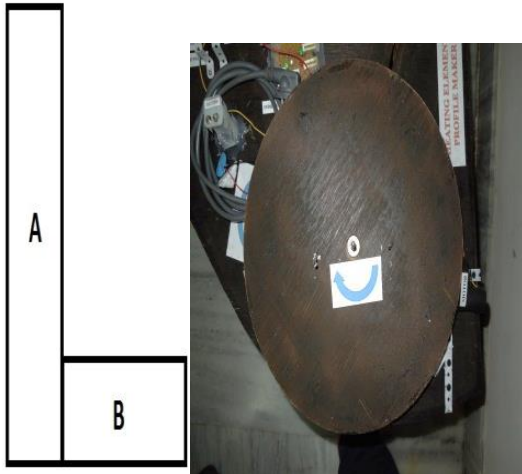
Schematic Design of Heating Element Profile Maker.
